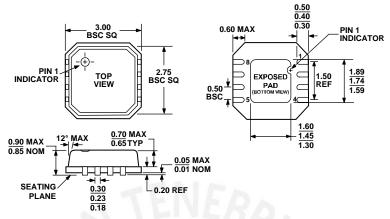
Lead Lead Frame Chip Scale Package [LFCSP_VD] 3 mm × 3 mm Body, Very Thin, Dual Lead (CP-8-2) Dimensions shown in millimeters
